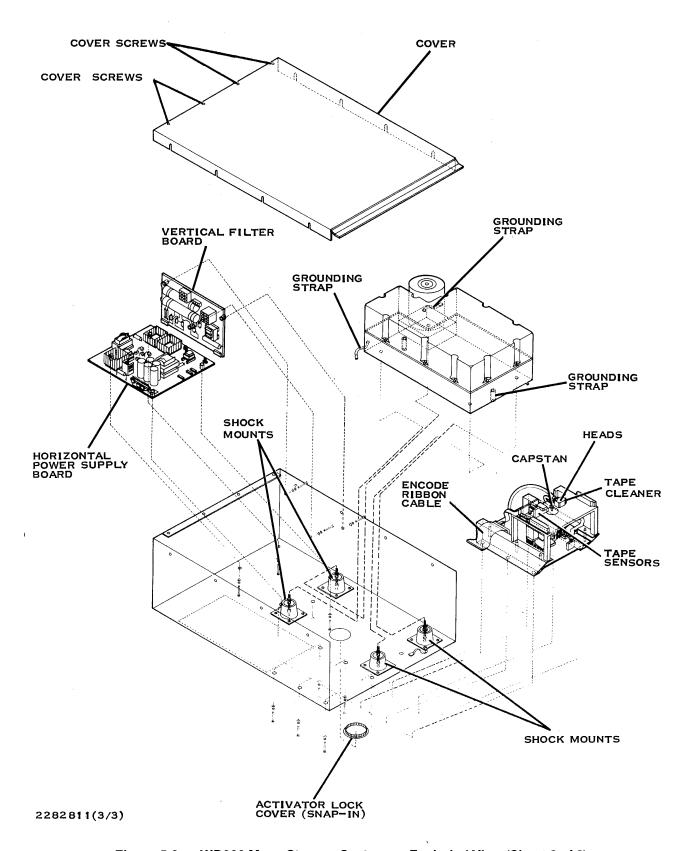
WD800 Mass Storage System — Exploded View (Sheet 3 of 3)
